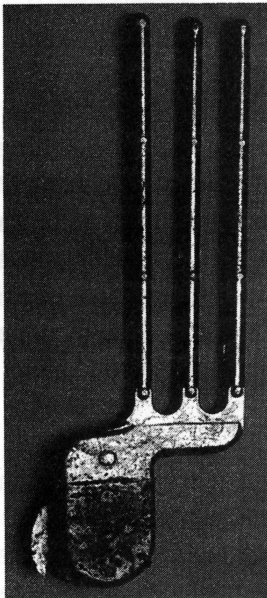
Vacuum Die Cast Test Bar Casting. Bar dimension - 16 mm dia. by 305 mm length.
